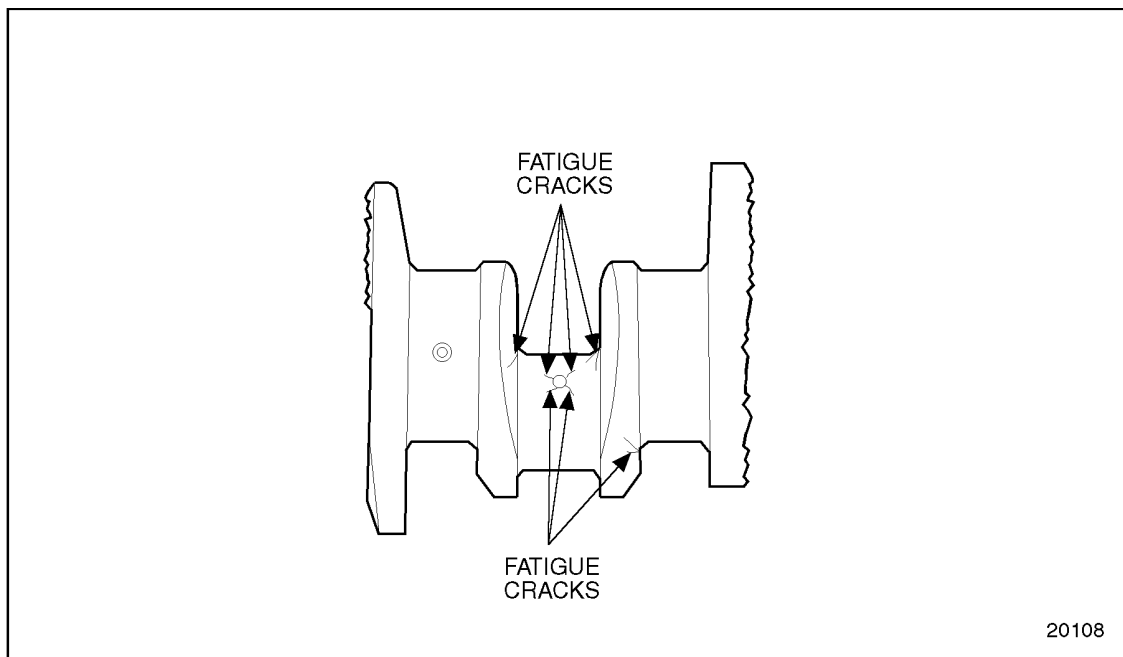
Crankshaft Fatigue Cracks
